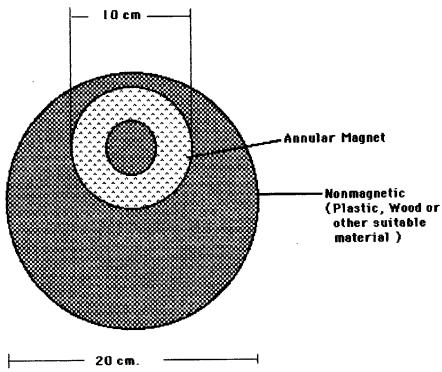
Bottom view of emergency intervention system magnet assembly disc
